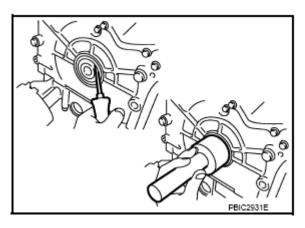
Removing Front Oil Seal Courtesy of NISSAN NORTH AMERICA, INC.
